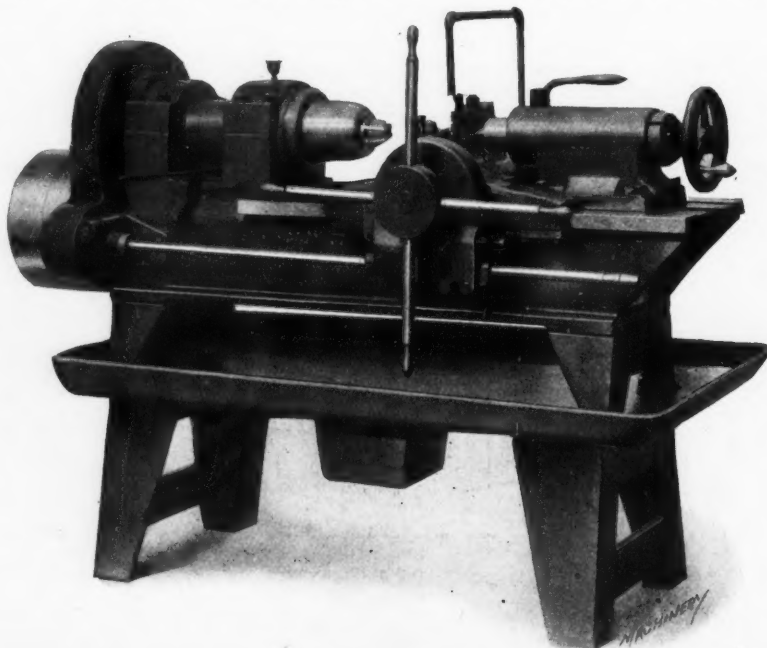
Type B Shell Lathe as equipped for rough-turning
